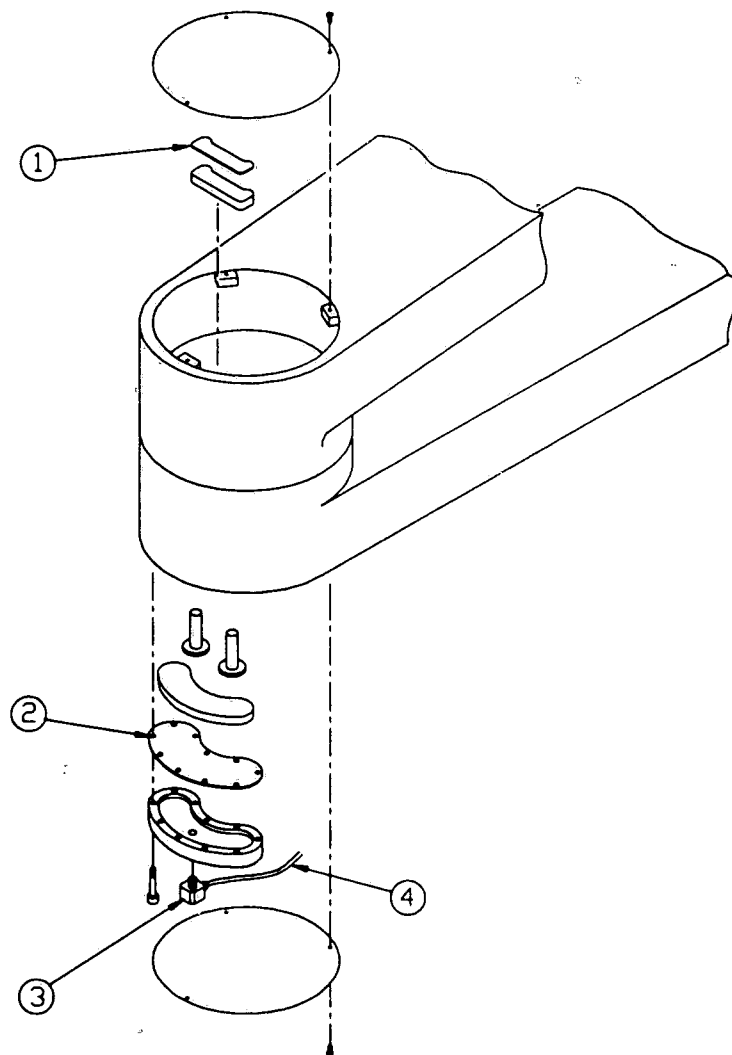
Air Brake Assembly, Piston/Bladder — Models 425 and 255F
